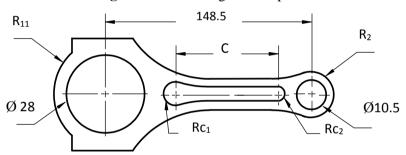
Connecting rod geometry and dimension (all dimensions are in mm).
